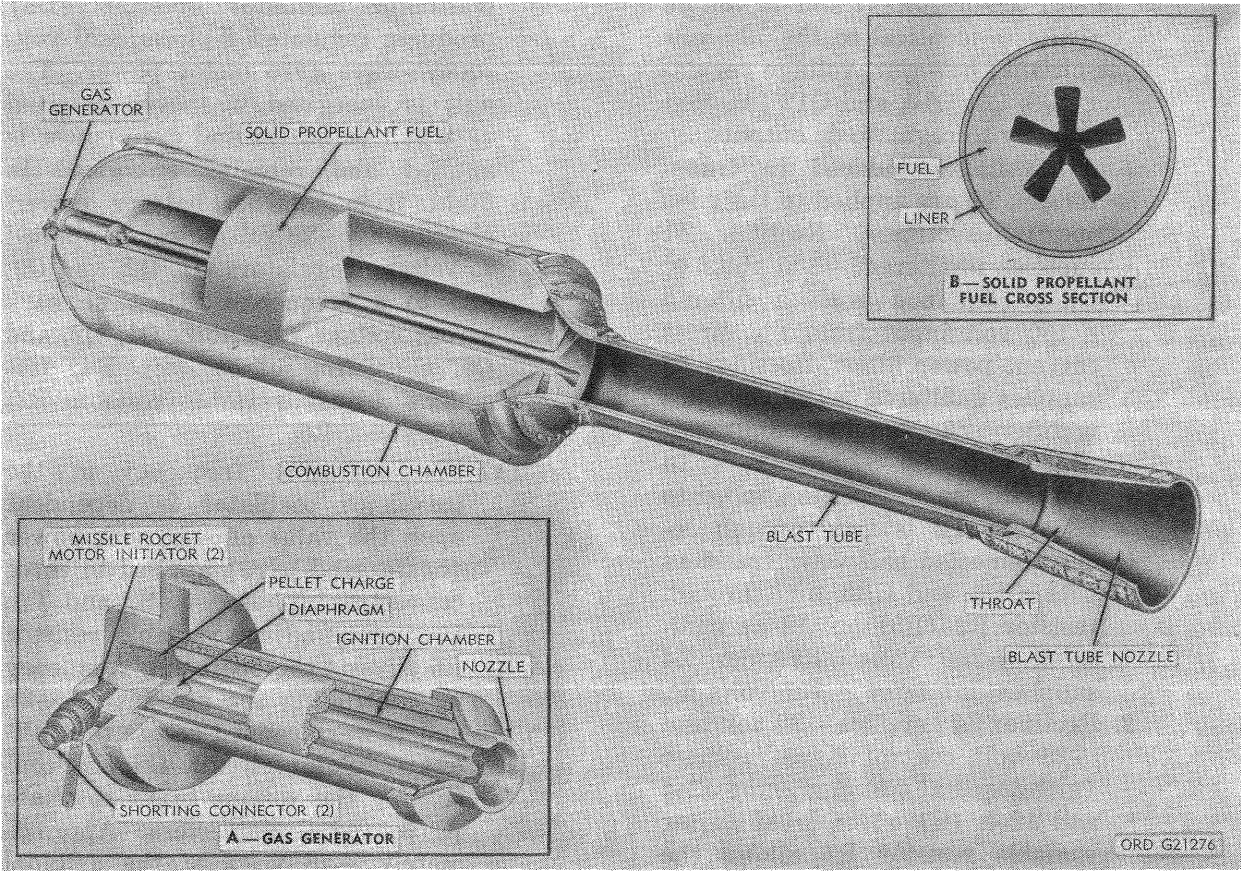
(U). Missile rocket motor M30—cutaway view (U).
